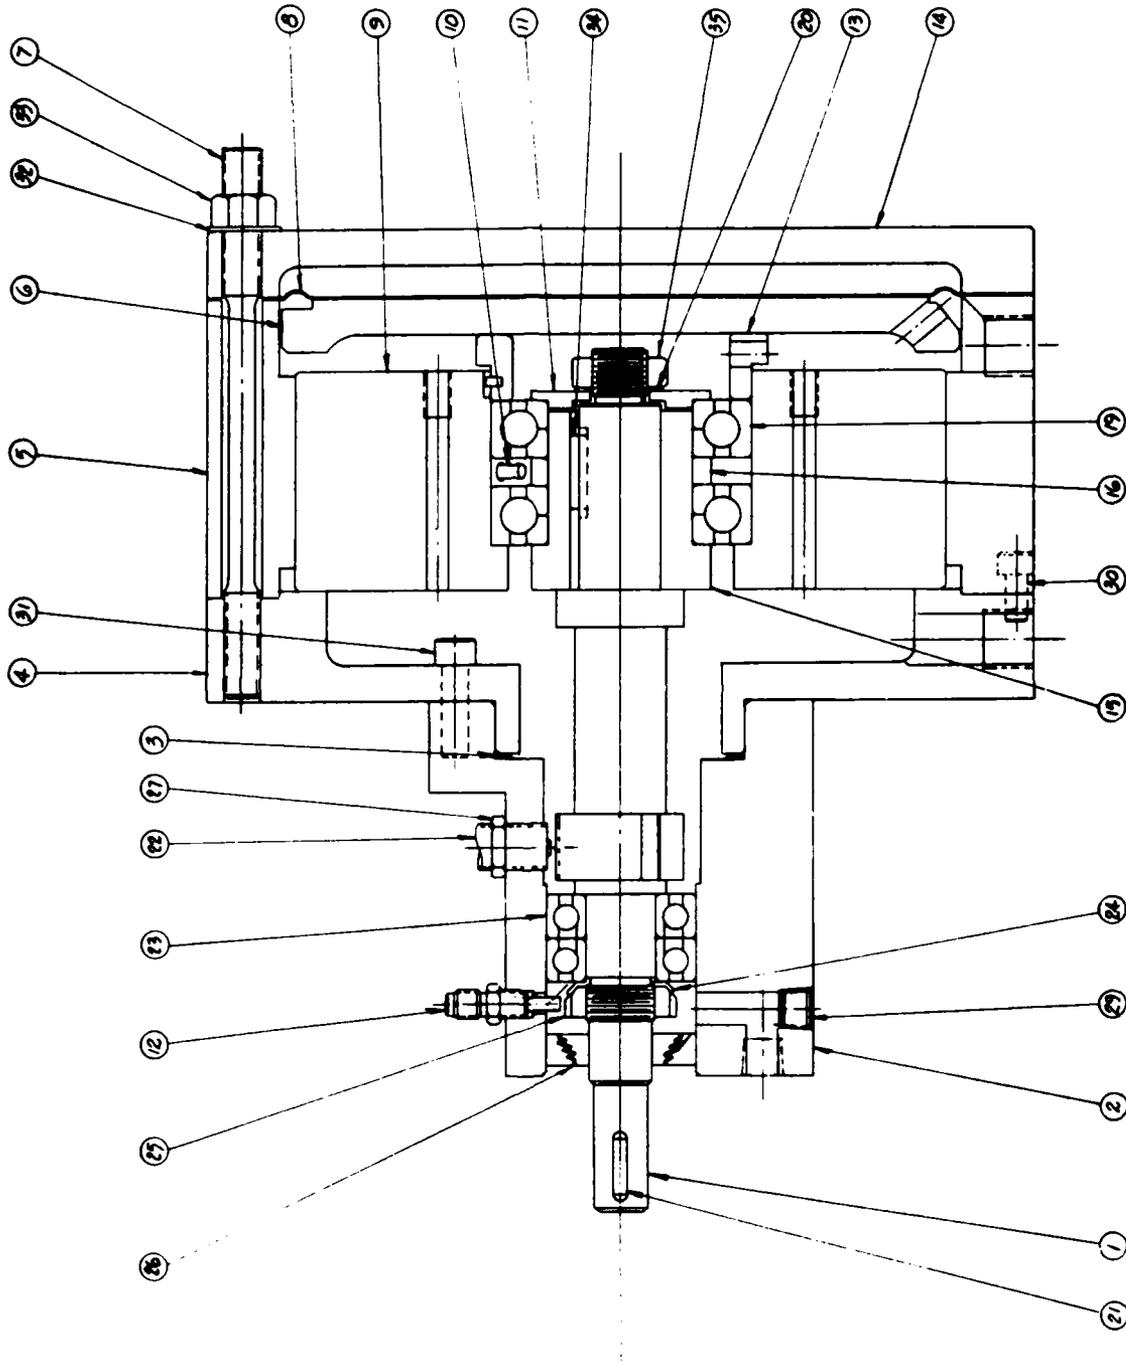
Cross-Section Of SwRI Test-Bearing Head
